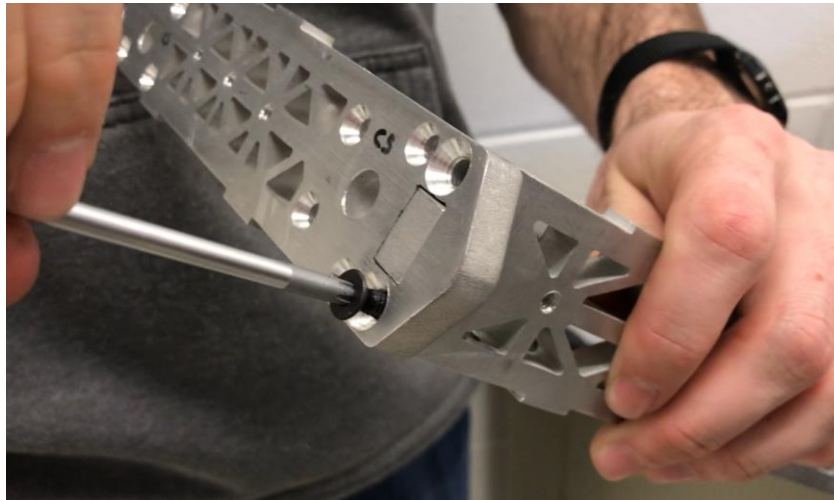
Side Plate Being Fastened to Rear Cross Member
